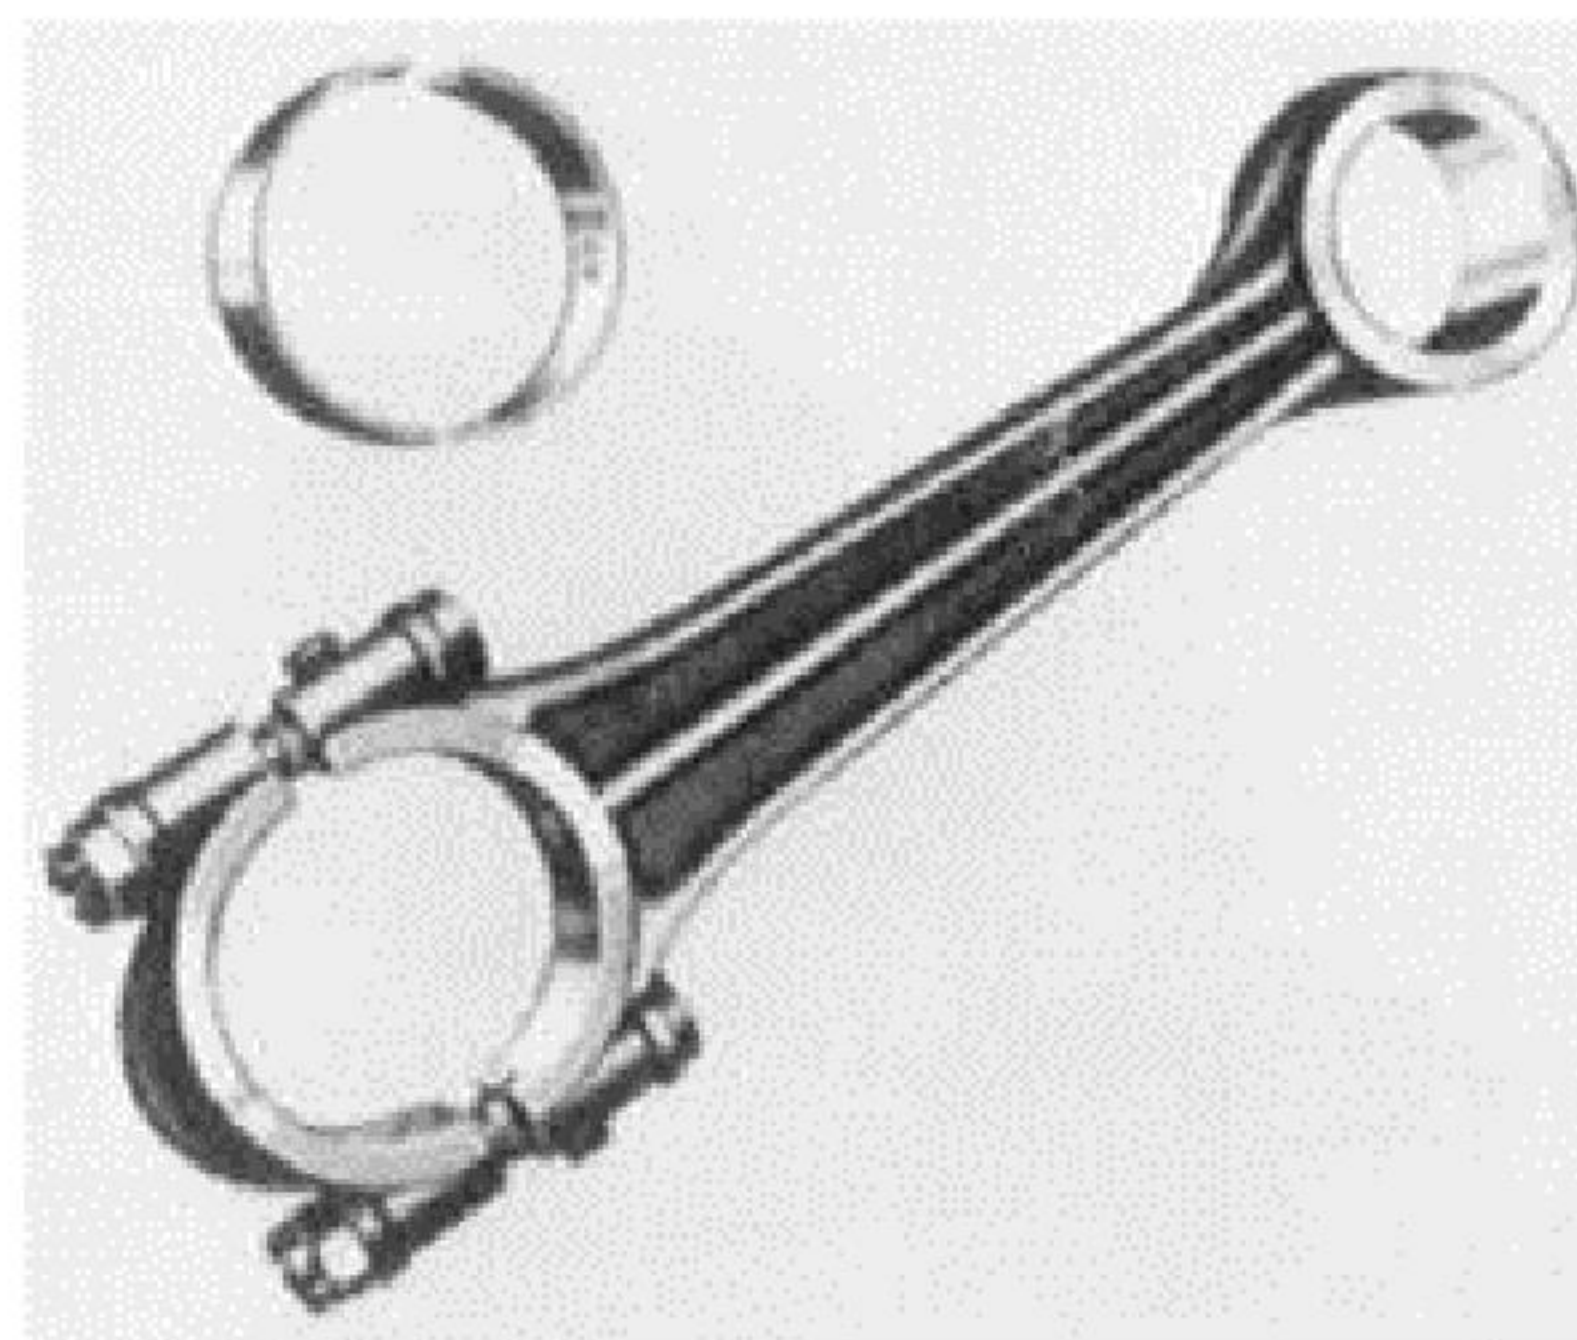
Automotive insert crankpin bearing with connecting rod.
